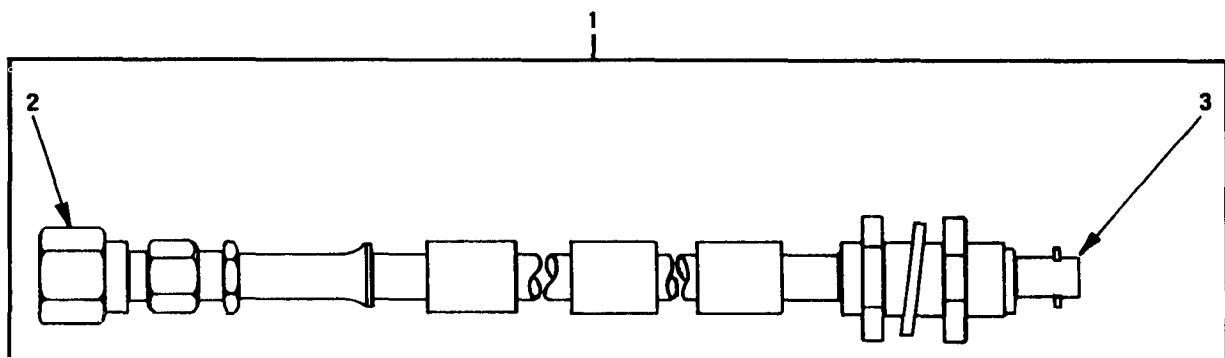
Internal coaxial cable assembly, part numbers 467-094-001, 467-095-001, 467-096-001, 467-097-001, 467-098-001 and 467-099-001
